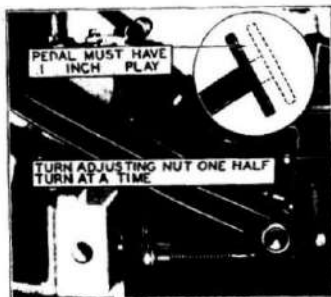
The clutch control must be adjusted so as to give the clutch pedal proper play.
